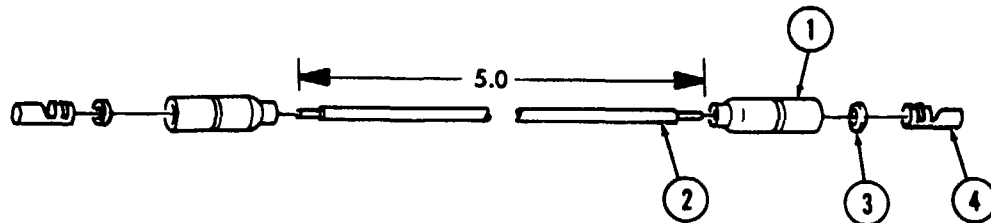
Wire "D" - Adapter "A" to Adapter Connector "B"
